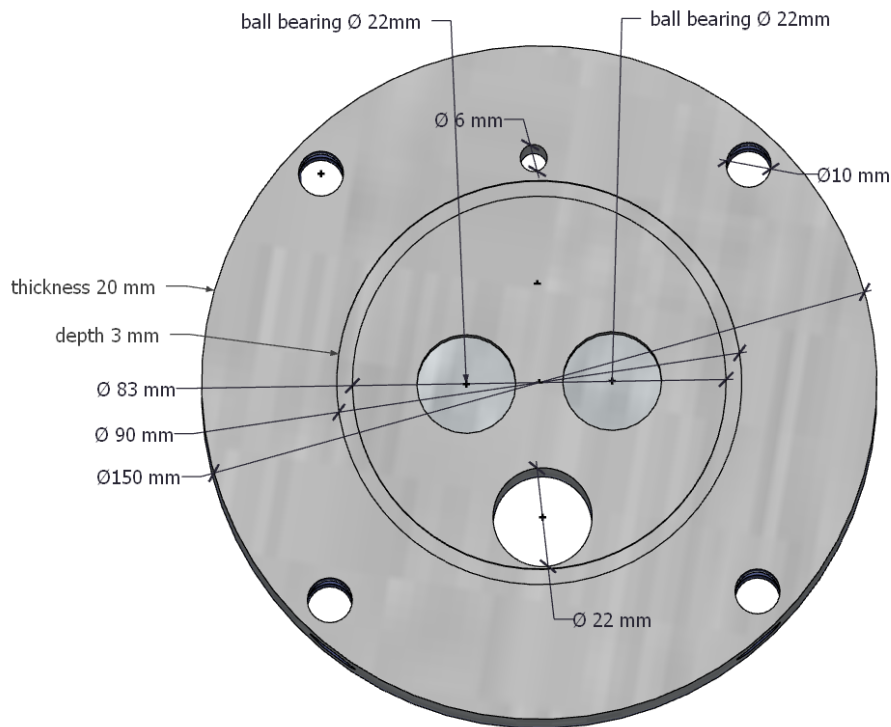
Top view of the stainless steel block placed under the glass tube
